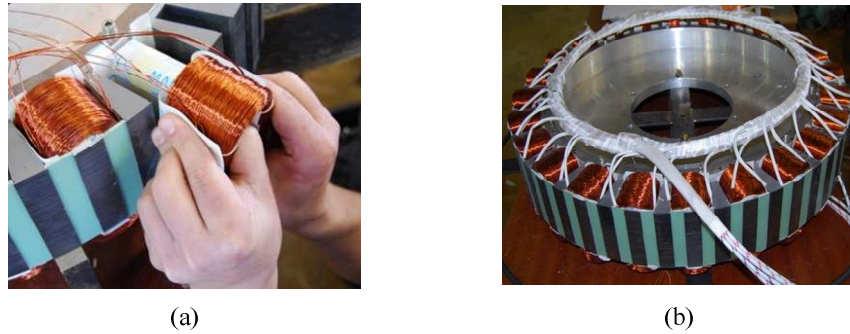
(a) Preformed coil being inserted; with (b) a complete single-layer non-overlap winding machine stator.
